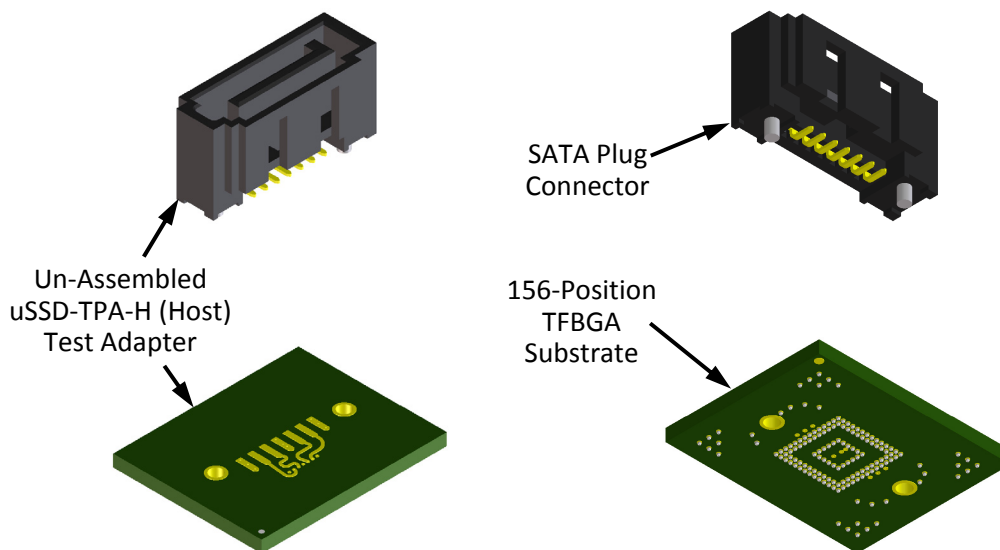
The Un-Assembled uSSD Host Test Adapter (Top and Bottom View)
